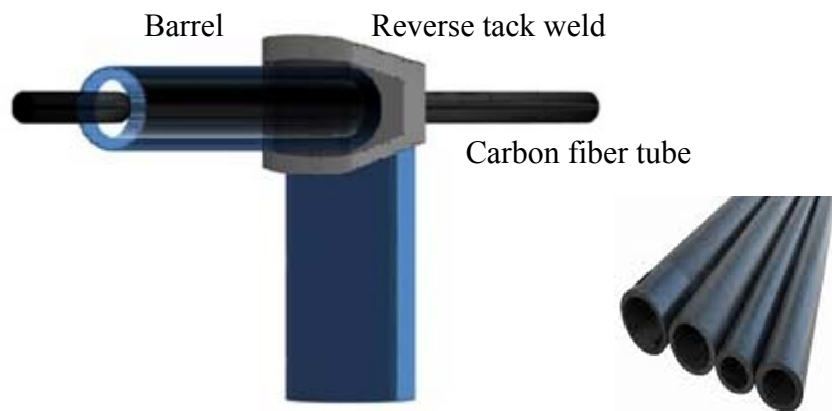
The tack weld translational stage (left), carbon fiber tube (right)
